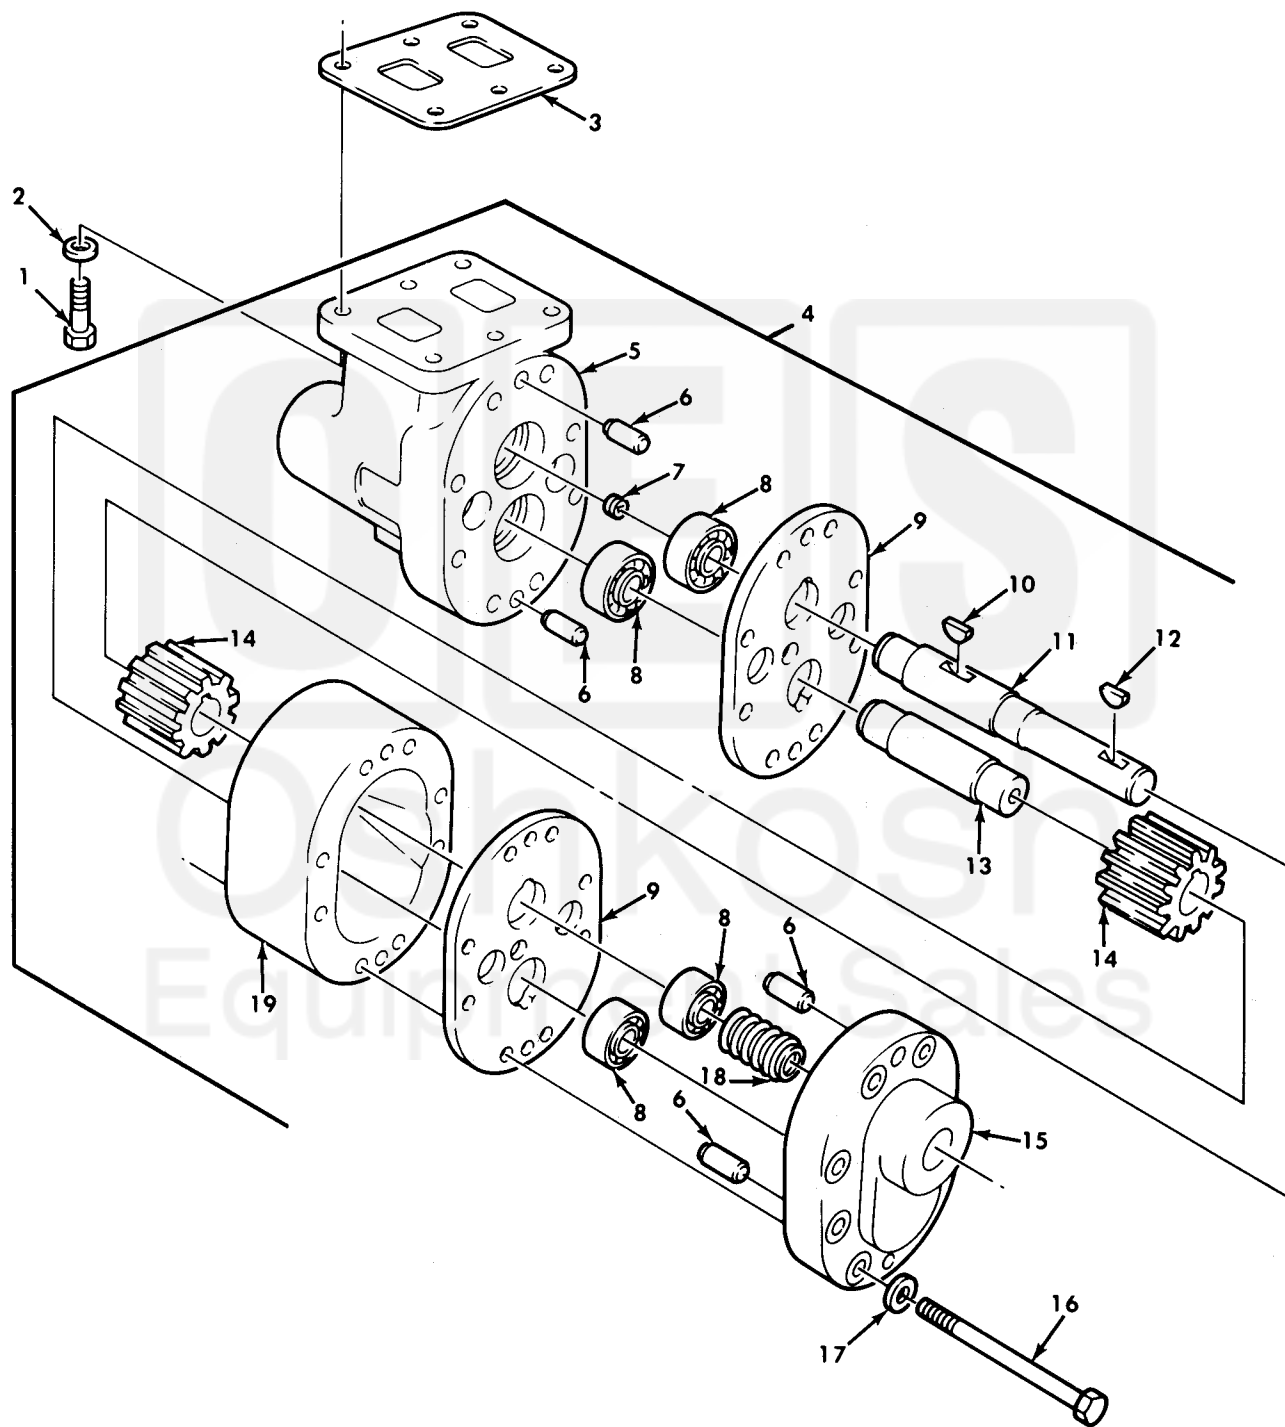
Dump Hoist Pump Assembly and Mounting Hardware.
